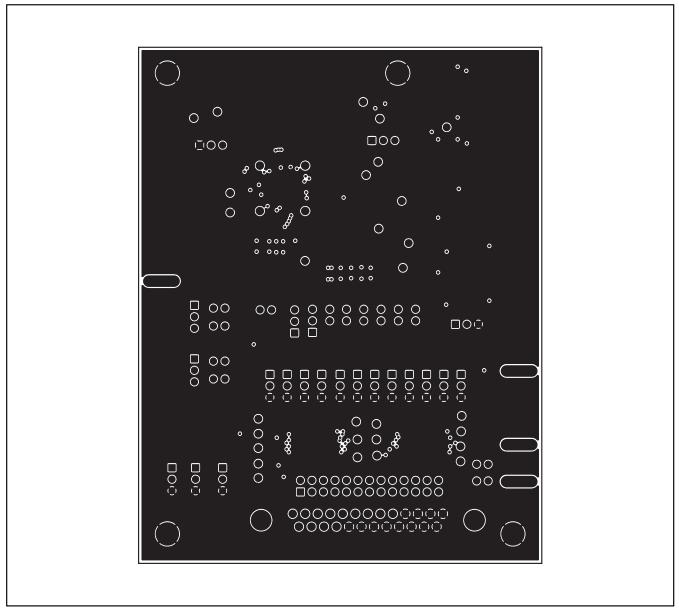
MAX2837 EV Kit PCB Layout—Inner Layer 2, Ground Layer
